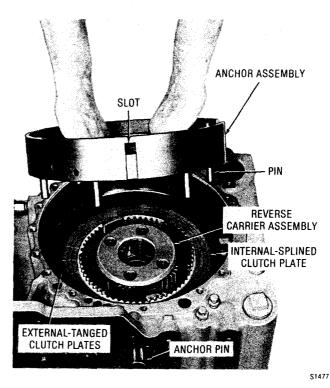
Installing forward-and-reverse clutch anchor assembly (TRT-3)
